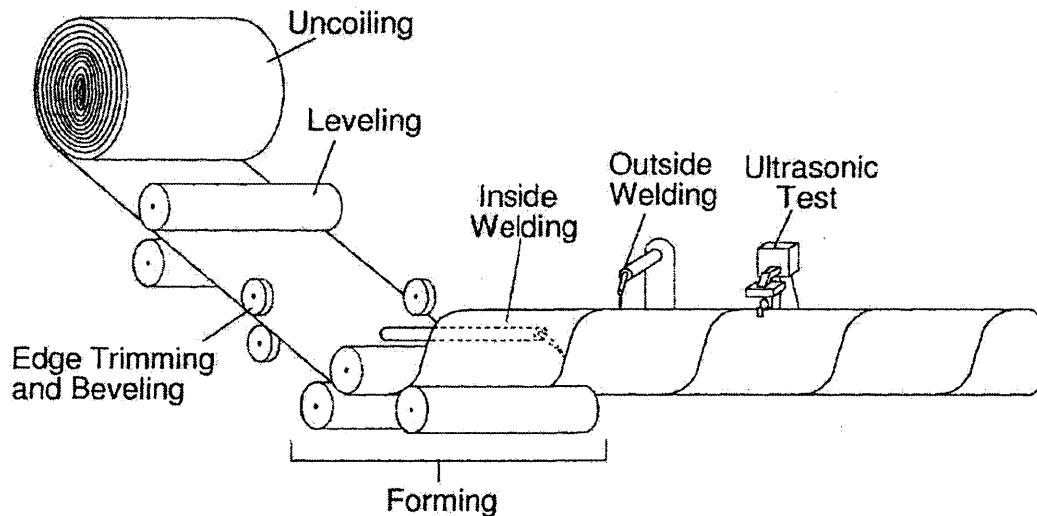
Schematic representation of the spiral weld mill manufacturing process [64].
